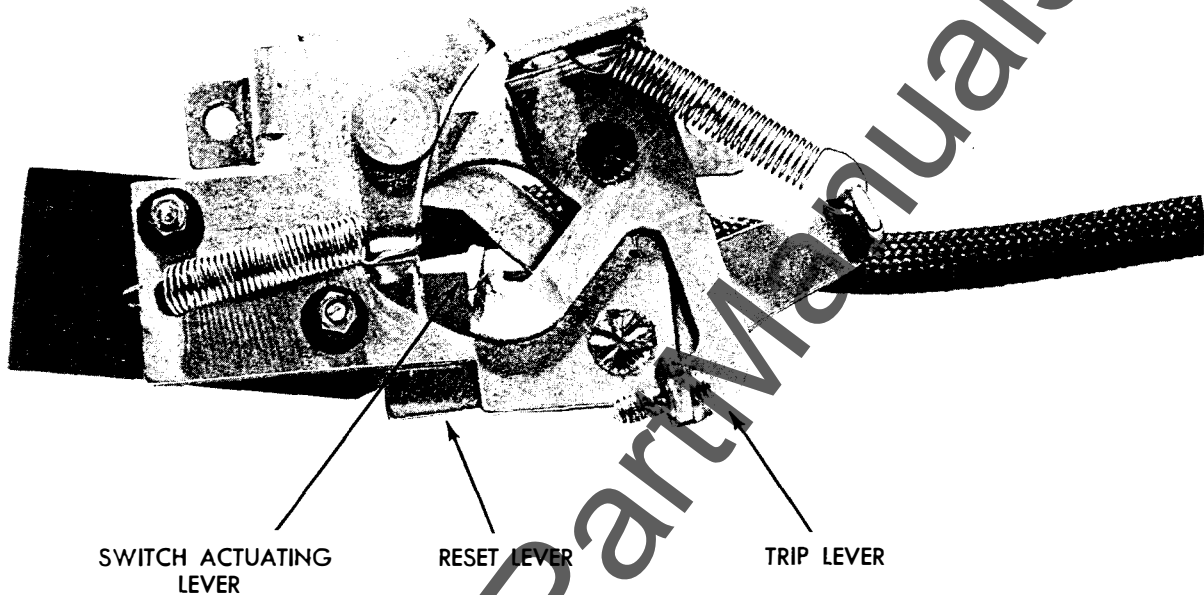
LOCKOUT UNIT SHOWN TRIPPED
